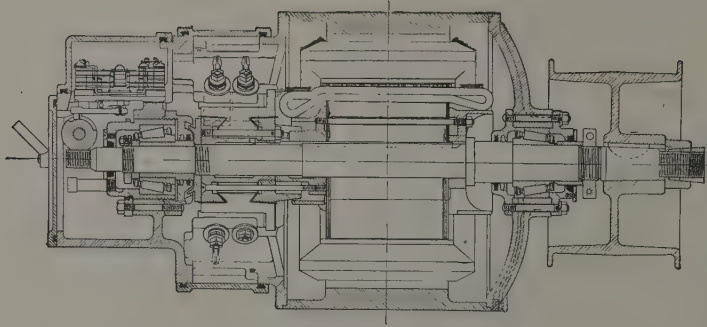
Section Through Dynamo with Timken Roller Bearings.
